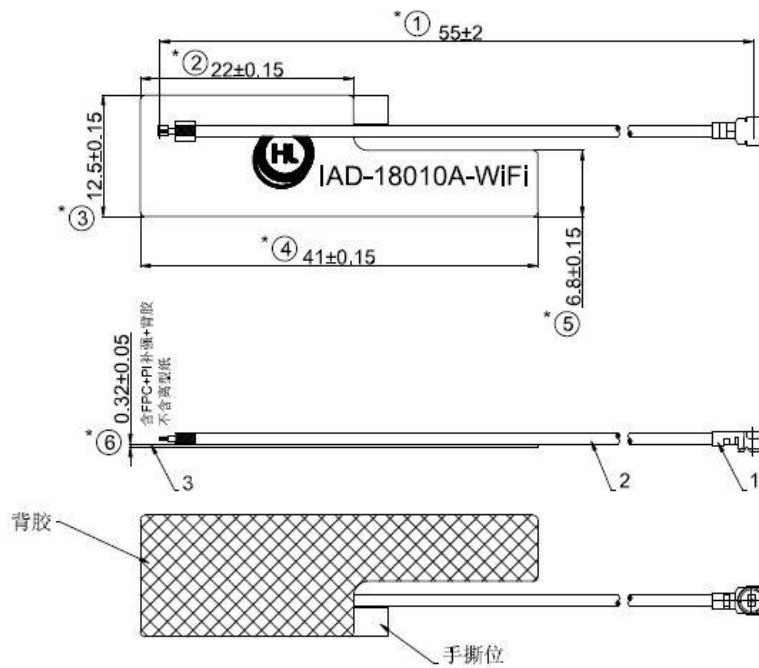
Basic dimensions and tolerances of 00-3601022800.
